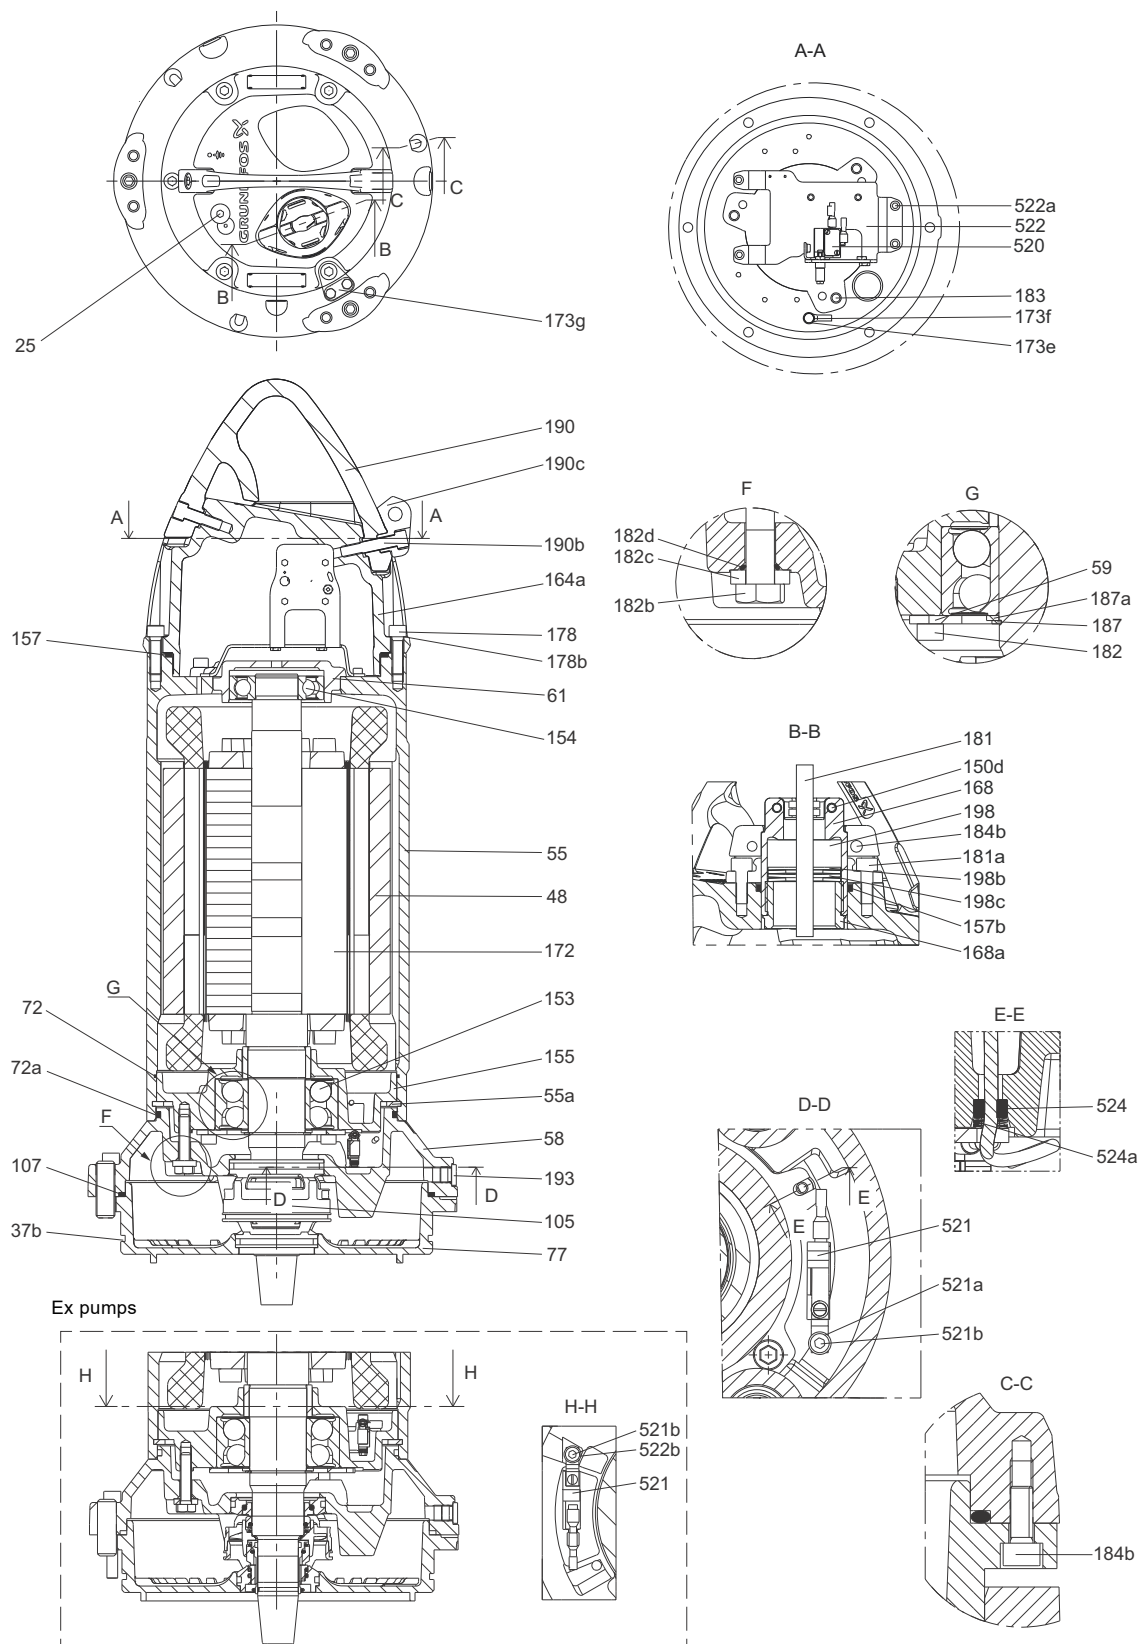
SE pump, with cooling jacket (2- and 4-pole motors) (H-H: Explosion proof version)
